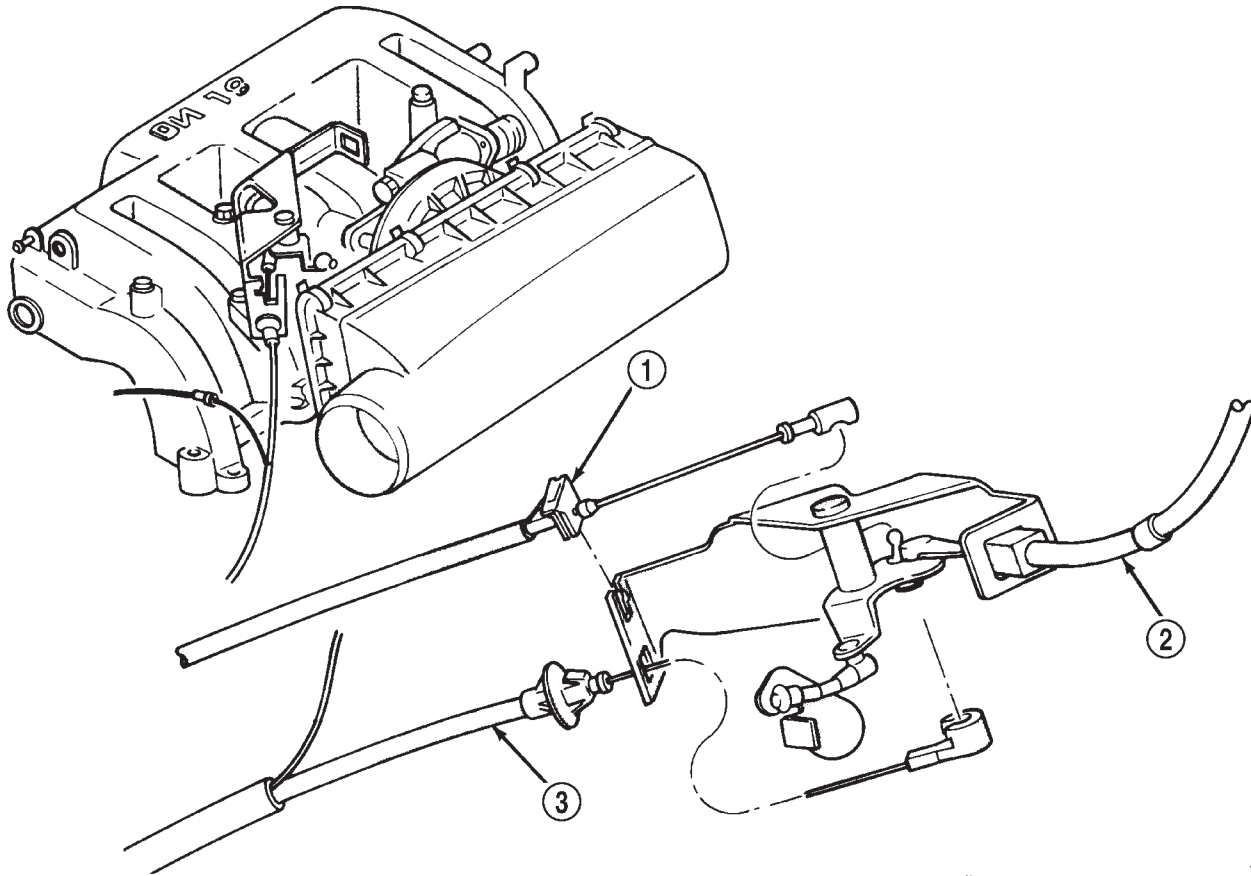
Servo Cable at Throttle Body—V6/V-8 Engine
